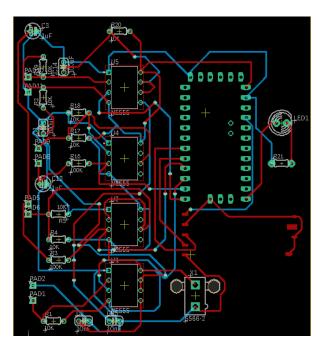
PCB Layout for the Integrated Bike Bar Circuit
